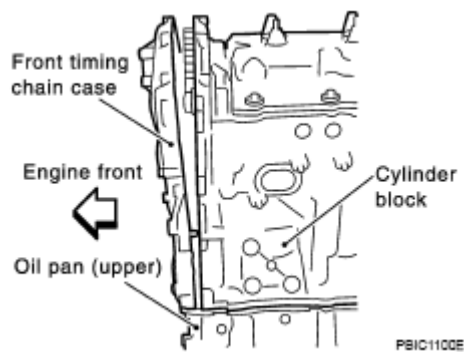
Fitting Lower End Of Front Timing Chain Case Tightly Onto Top Face Of Oil Pan (Upper)
